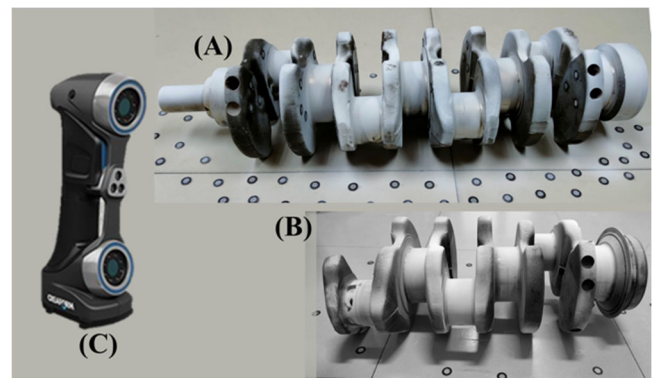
(A) New crankshaft, (B) broken crankshaft, (C) 3D laser scanner
